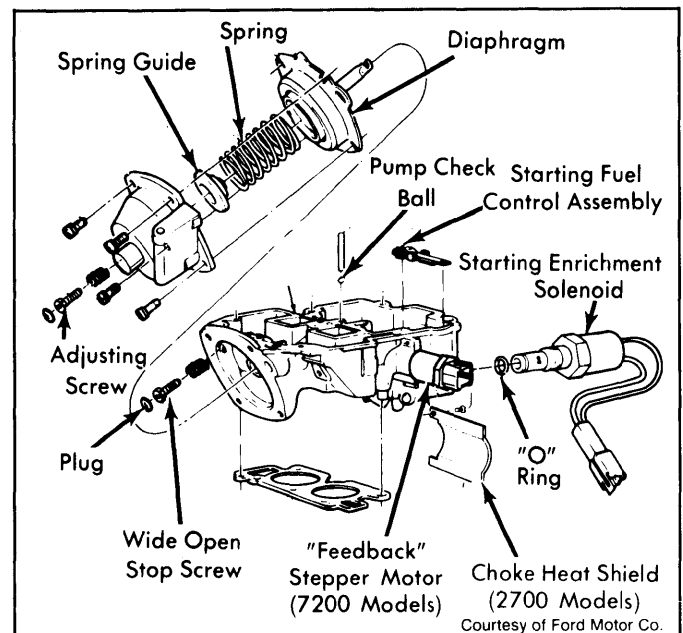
Exploded View of 2700 & 7200 Carburetor Main Body
